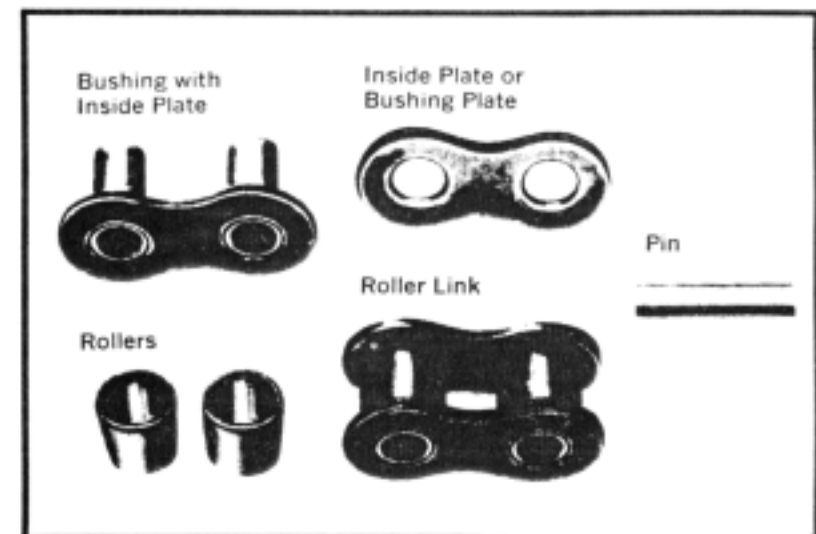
Inner-link components. The outer link consists of two side plates, riveted on the pins. (Courtesy Daido Corp.)
